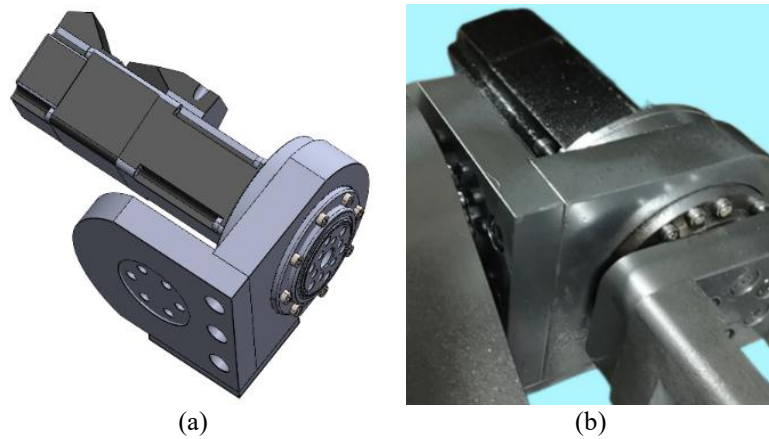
Mechanical design of Joint 4, (a) CAD design, and (b) The prototype
